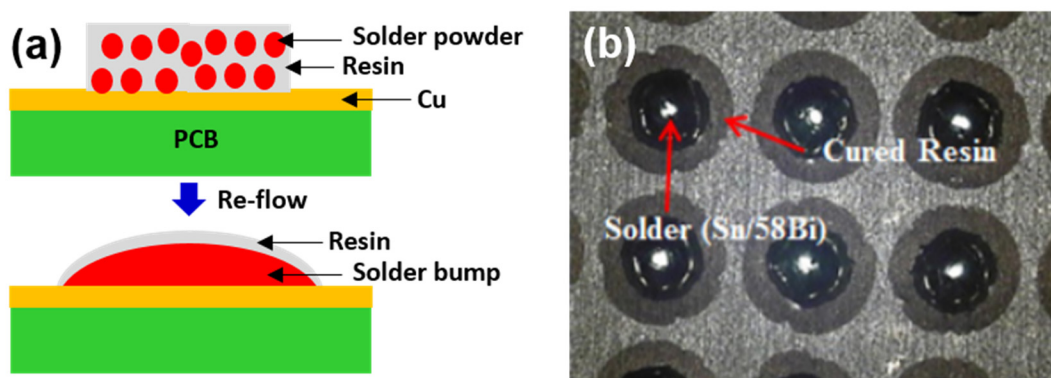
(a) Schematic diagram of epoxy solder paste bumps reflowed after printing on Cu pads and (b) the actual image of reflowed solder paste bumps, reproduced from [33], with permission from Journal of welding and joining, 2015.
